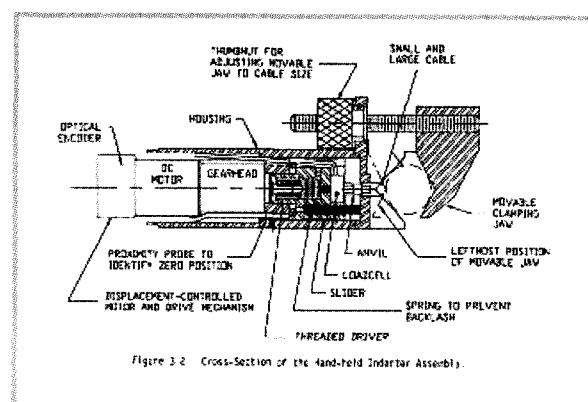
Cross-Section of the hand-held Indenter Assembly.
